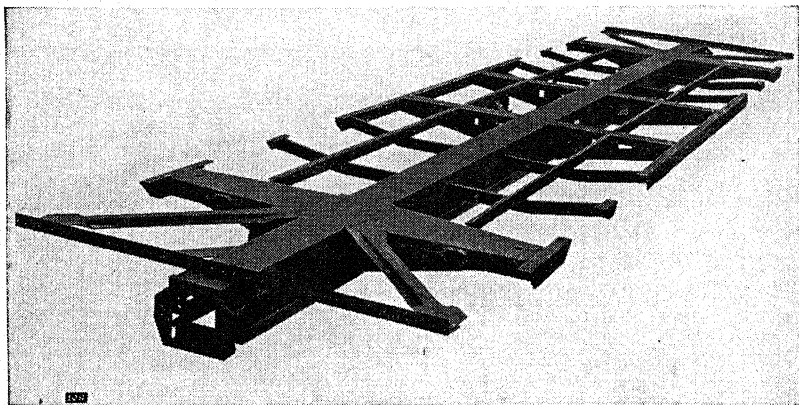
Arc welded underframe for railroad freight car. 1000 lbs. lighter, 10% less costly than former riveted frame shown in Fig. 2.
